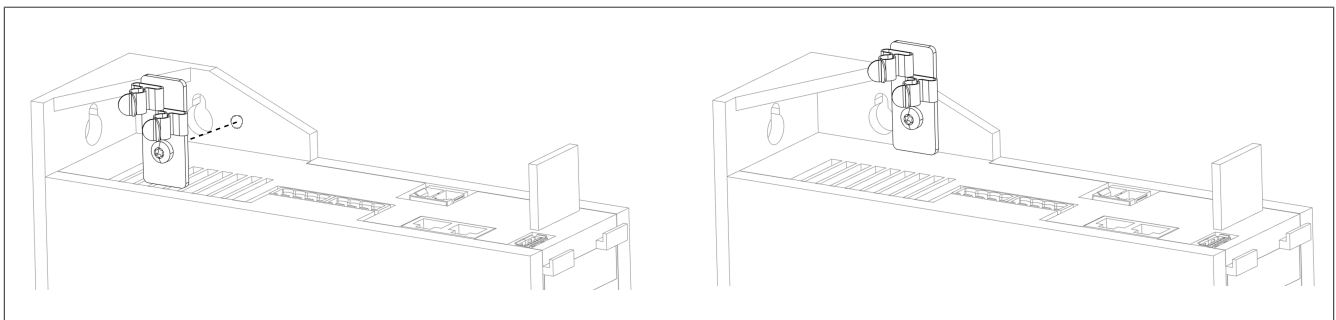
Shield component set 8SCSE01.0300-00 - Installation (servo drive with 66 mm width)
